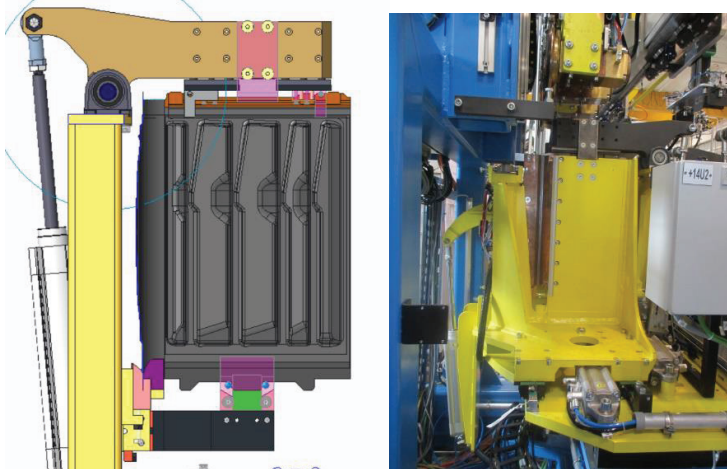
U-circumference and the oven ceiling are ready for seam welding
